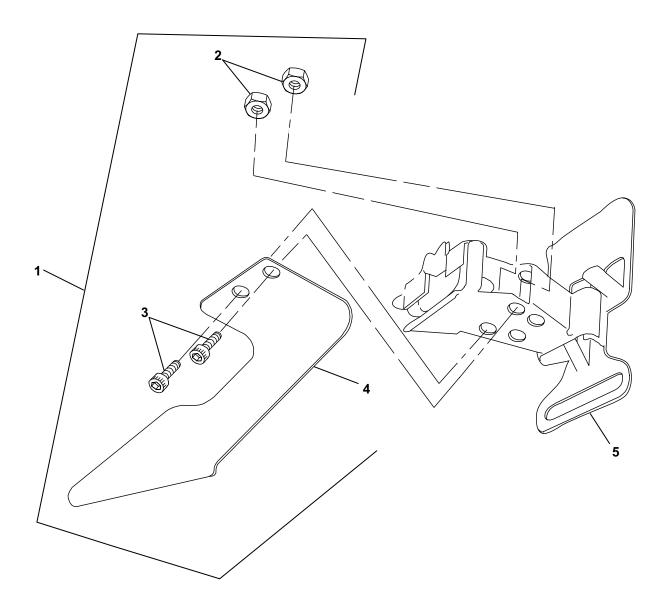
Ammo Adapter Bracket Assembly and Deflector 12986106
